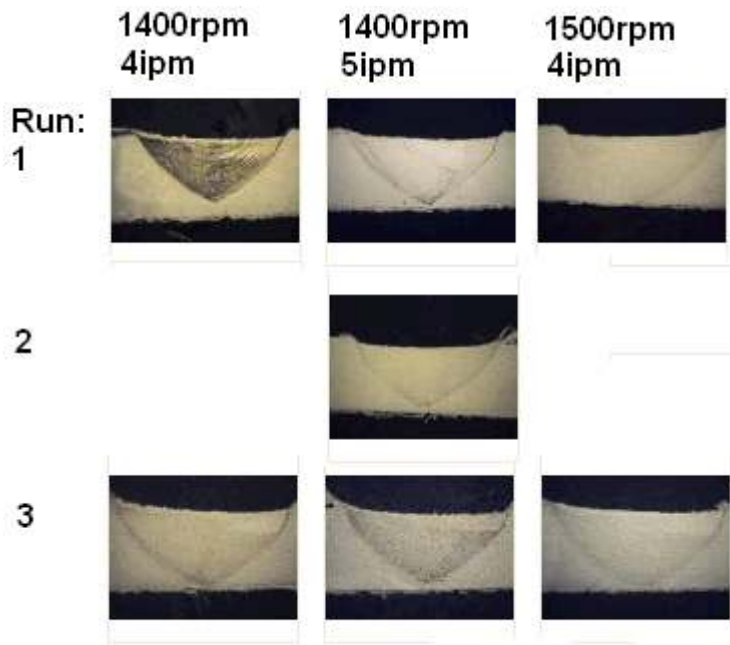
90° conical tool macrosections. Some 90°, Run2 welds were not macrosectioned.
